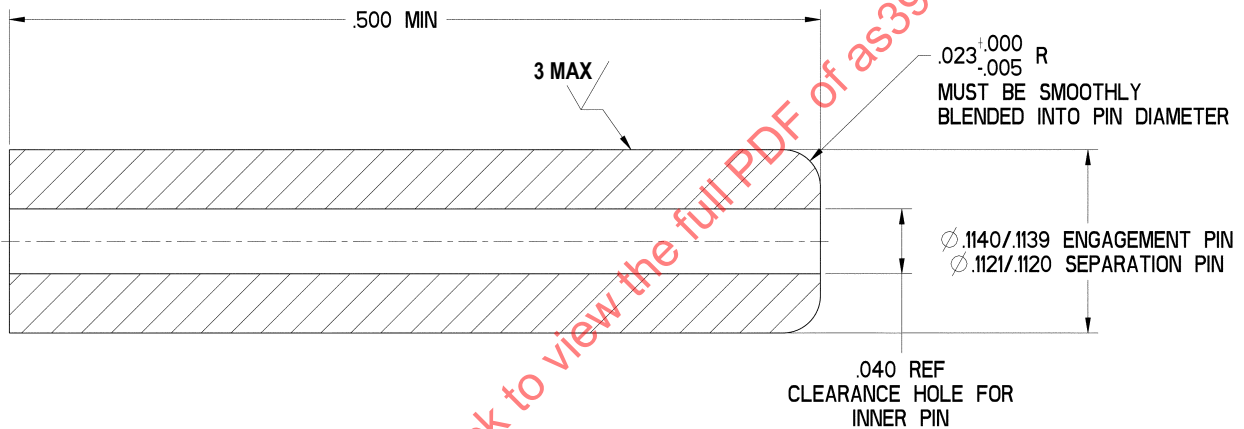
ENGAGEMENT AND SEPARATION TEST PIN DIMENSIONS
